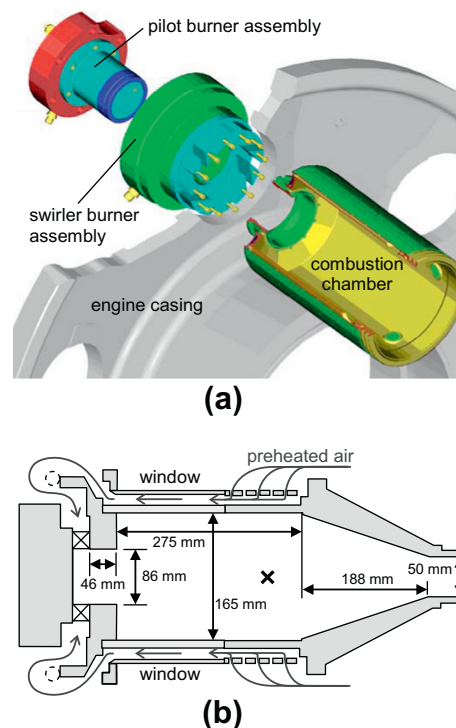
The industrial burner with the commercial cylindrical combustion chamber (a) and with the optically accessible combustion chamber (b) (based on [65]). A cross marks the location of the acoustic probe. Two dashed circles represent the perforated ring tube used for particle seeding.
